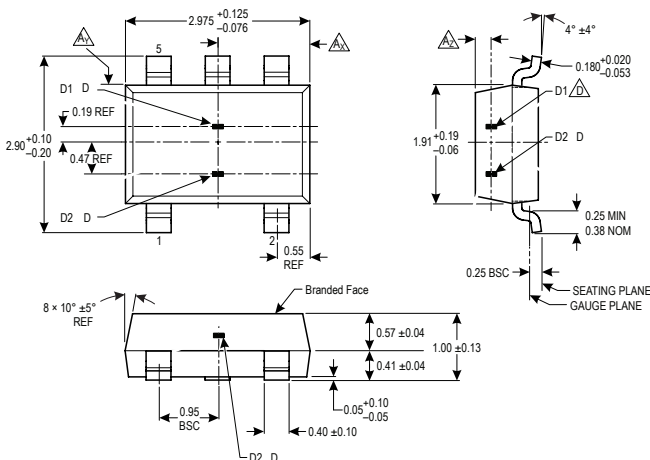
LH package 5-Pin SOT23-W package drawing showing dimensions
